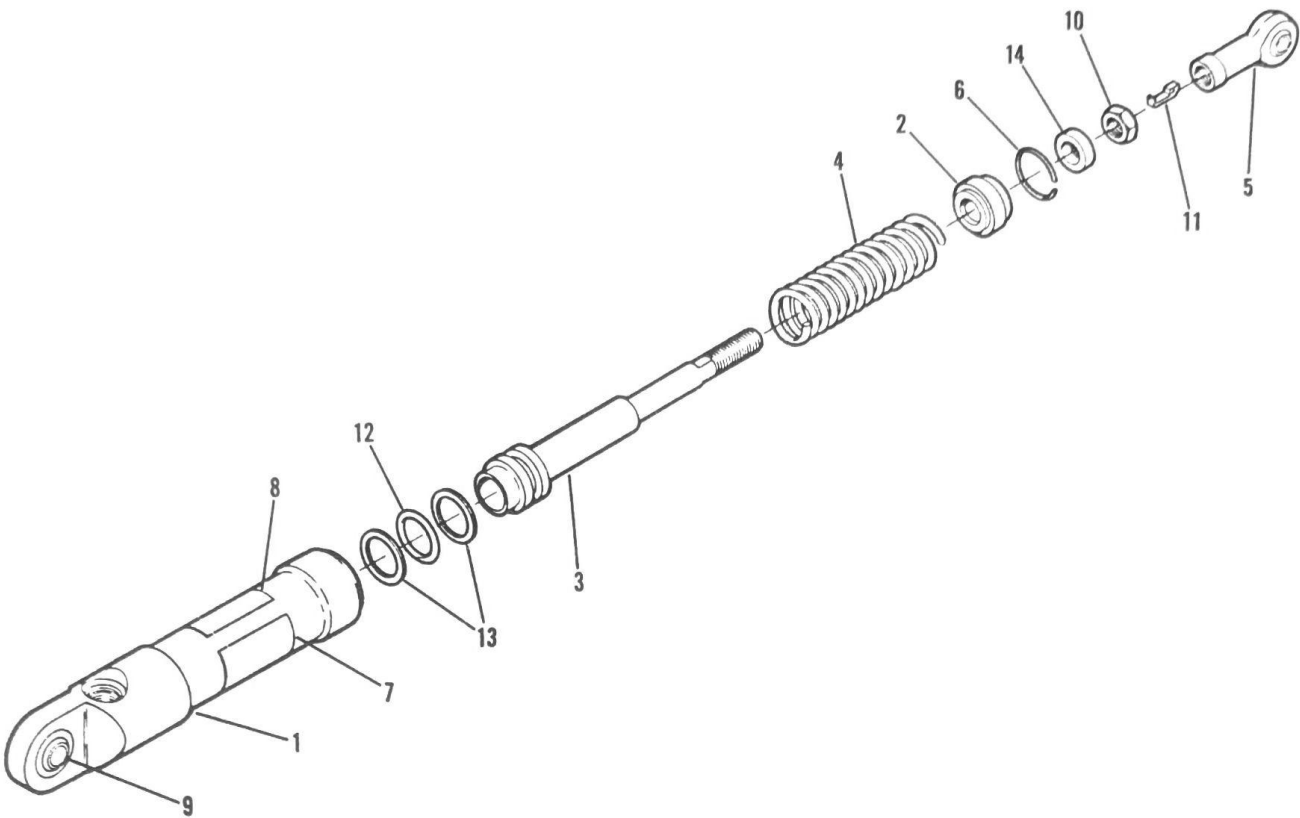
A. Main Gear Door and Nose Gear Uplatch Actuator Assembly
